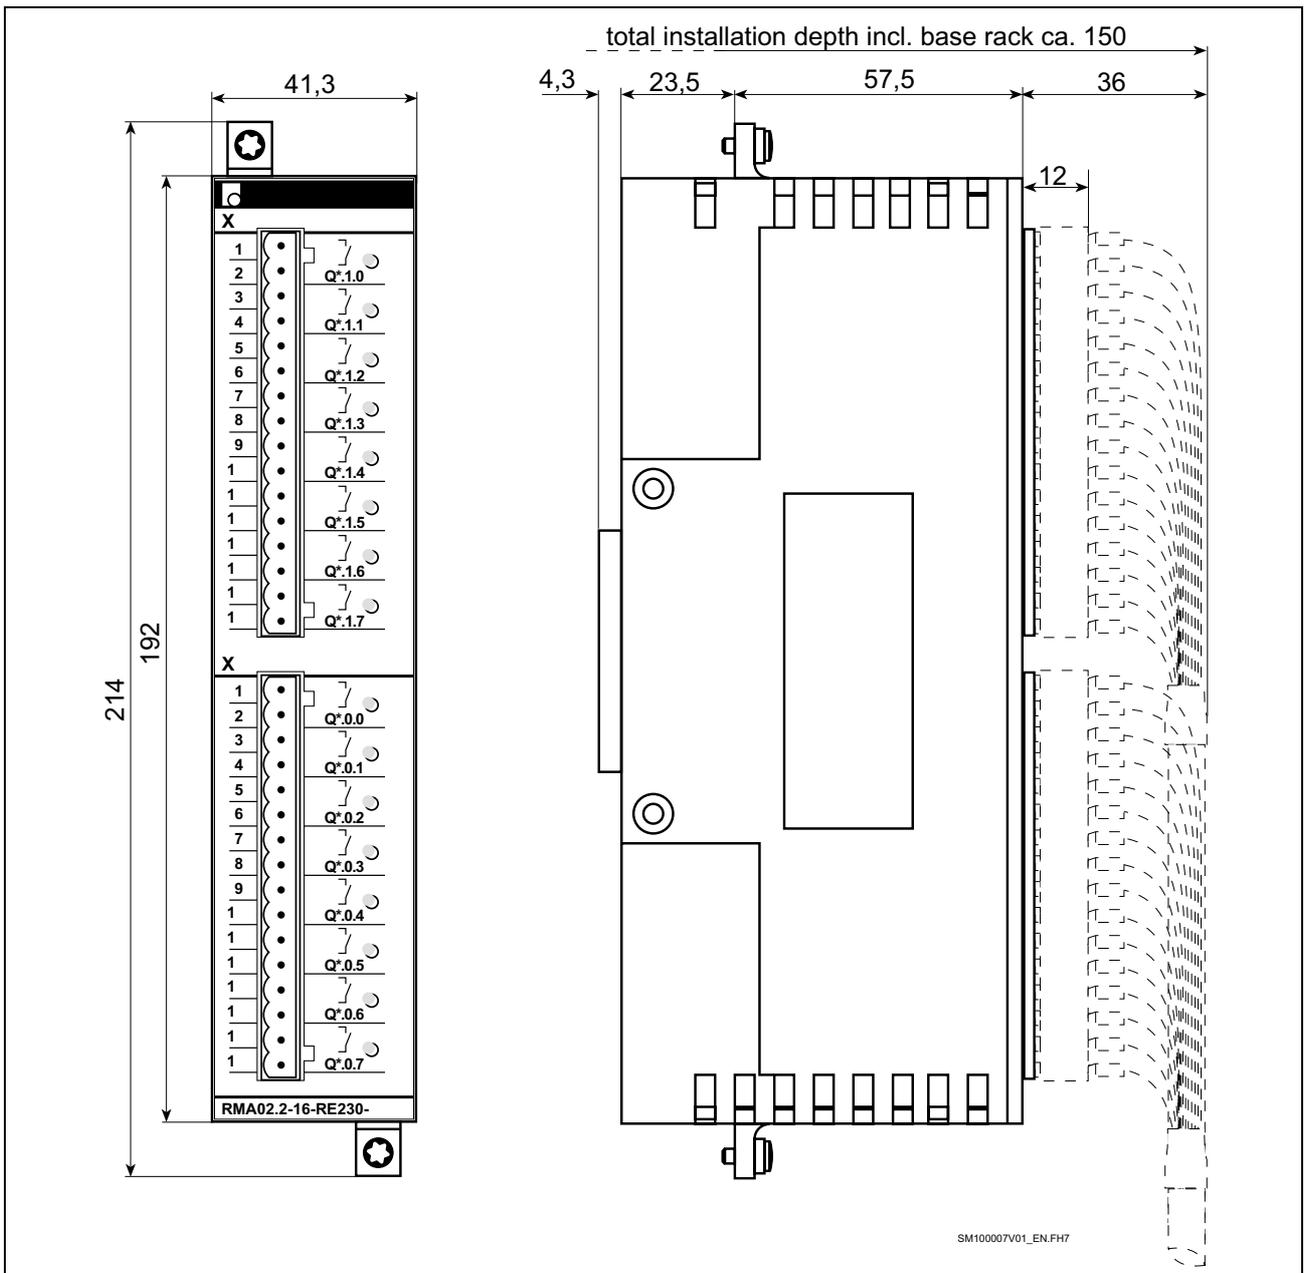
Dimensional sheet RMA02.2-16-RE230-200
